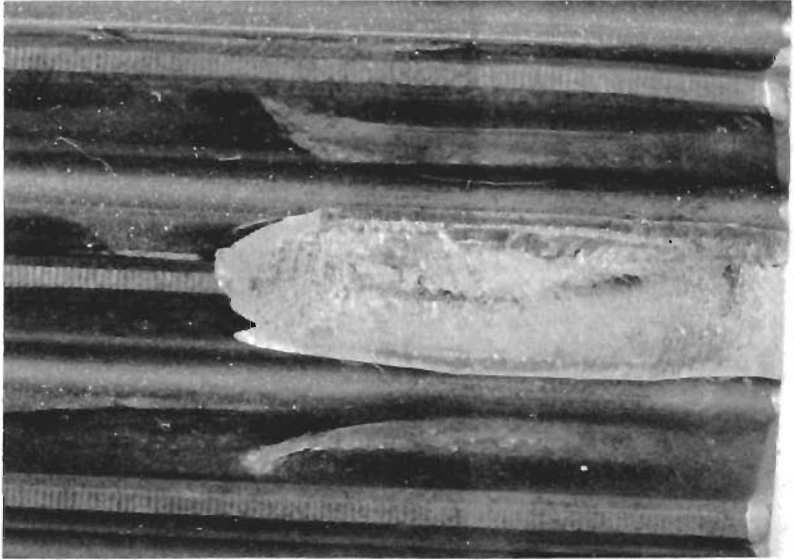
Spur gear, 3 \times . Tooth bending fatigue with origin from a crack at both root radii caused by the enmeshing of a portion of a needle bearing roller.
